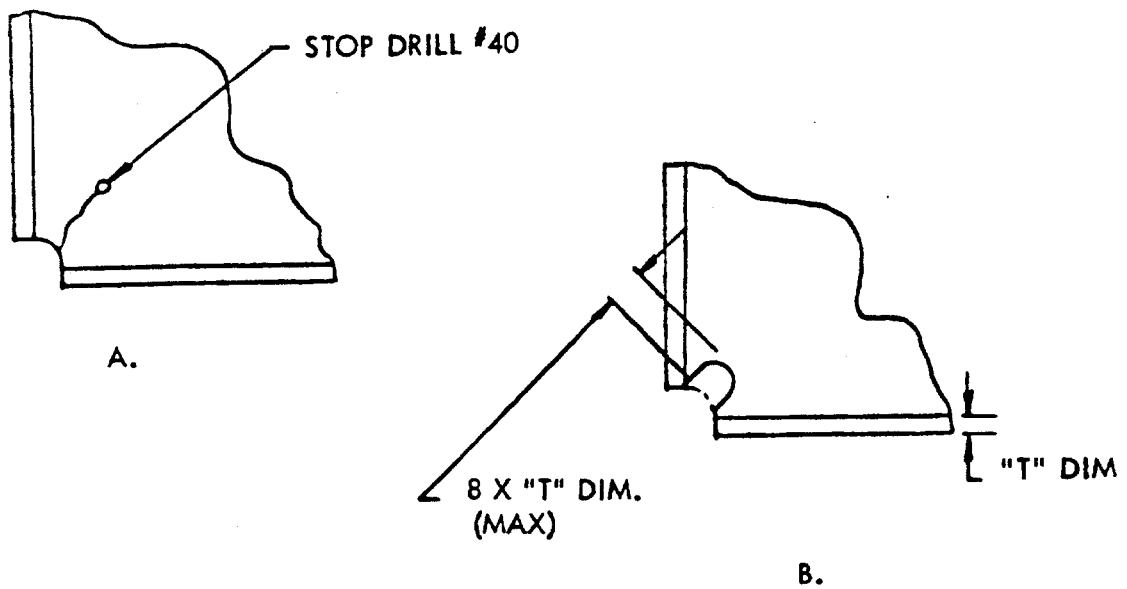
MINOR CORNER CRACKS IN DOUBLE-FORMED FLANGE
